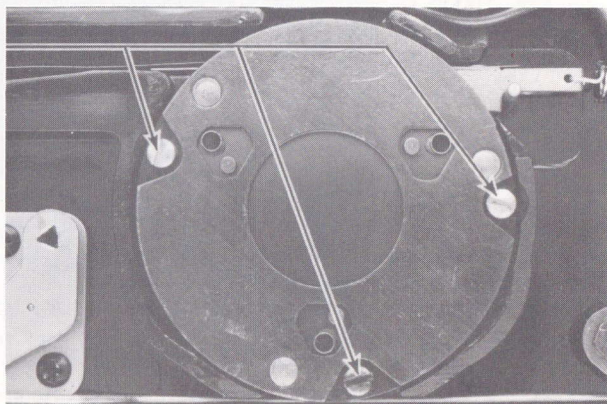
SHUTTER HELD OPEN ON "BULB"
